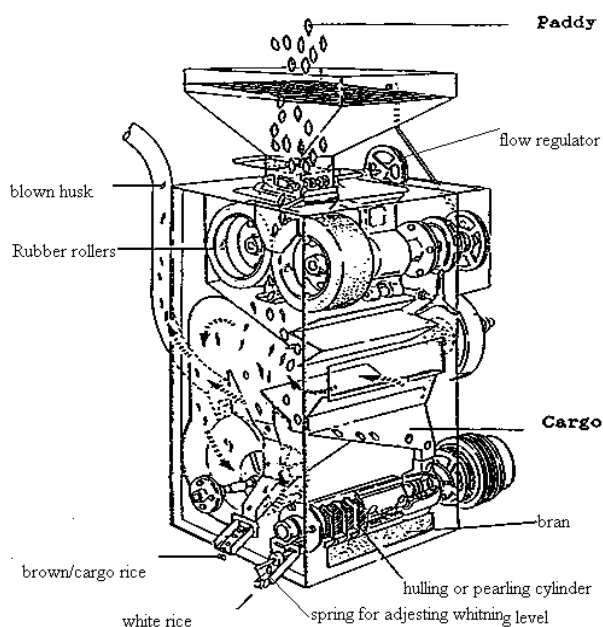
Internal views of Rubber Roll Sheller Mill (RRSM)
